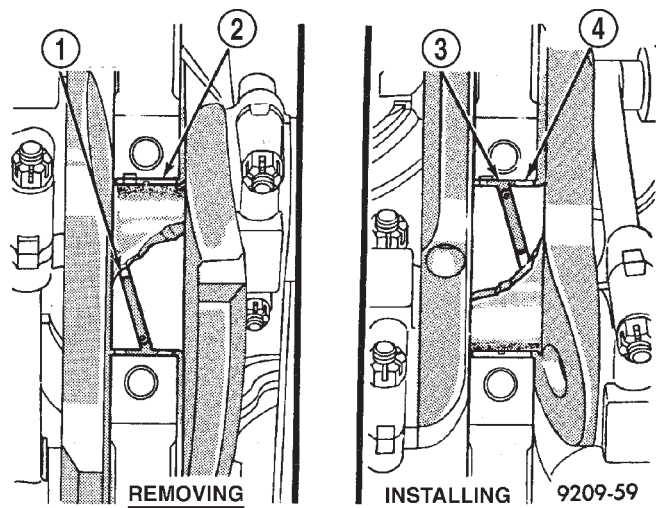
Upper Main Bearing Removal and Installation with Tool C-3059
